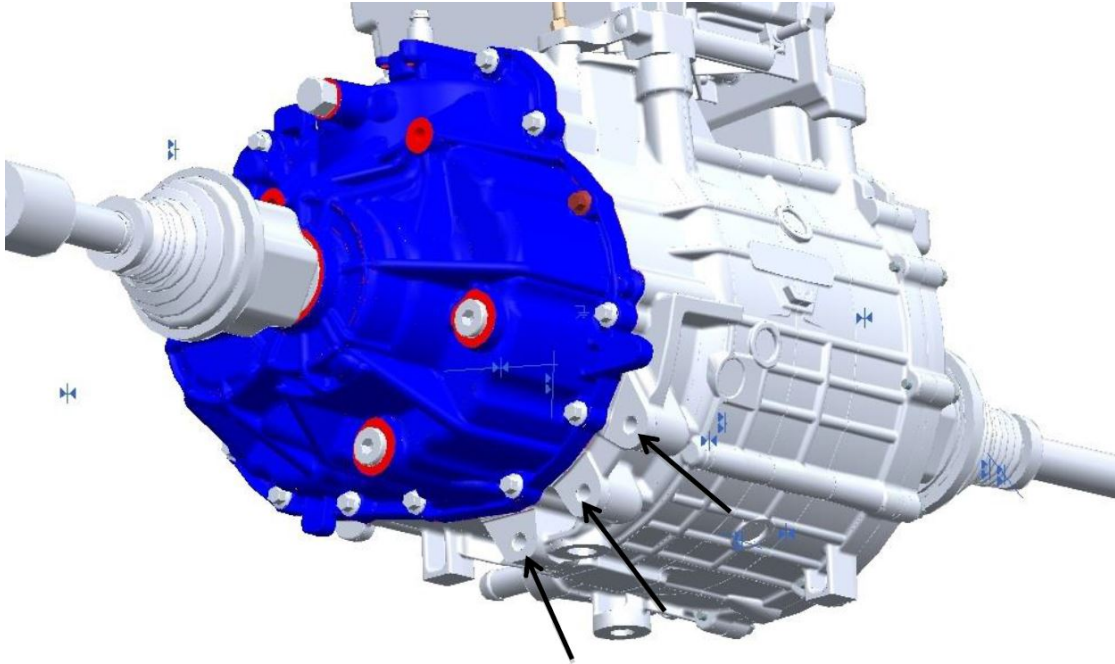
Torsion-Resistant Driver's Side Mounting Points.
